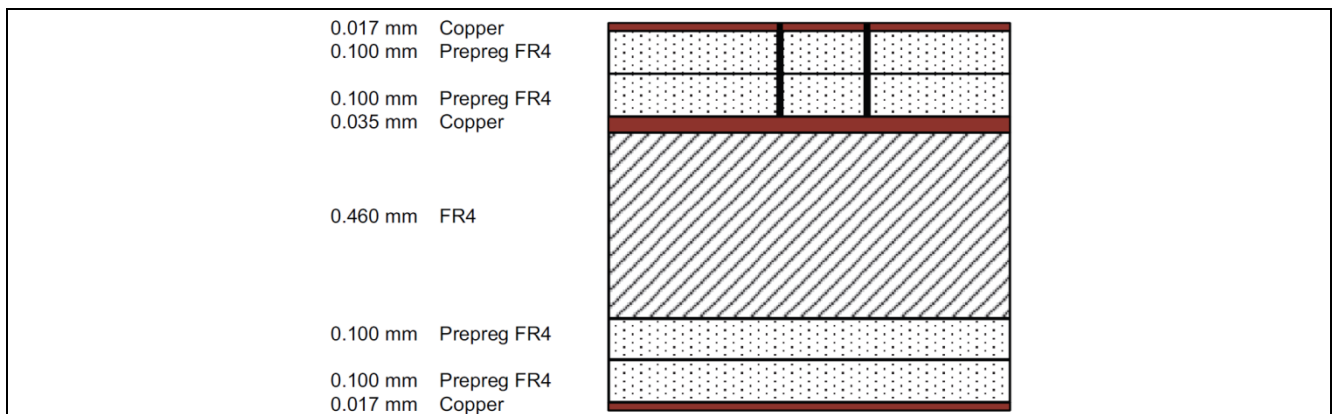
PCB Layer Information of BGA711N7 evaluation boards
